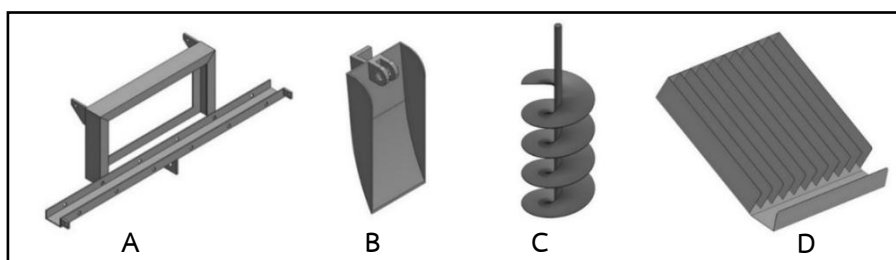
(A) Axle tractors(B) Digging shovel (C) Drilling, (D) Carriage truck
